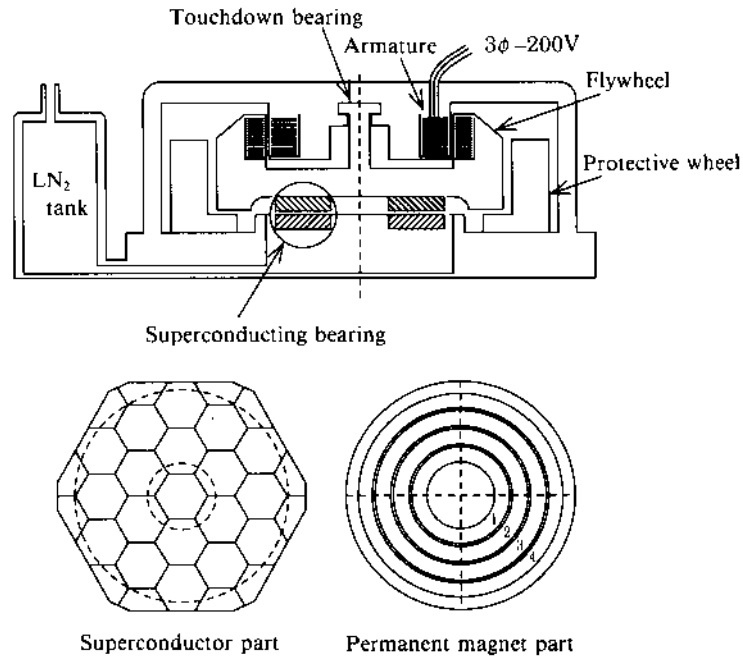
Flywheel system and details of superconducting magnetic bearing assembly (Higasa 1994).
